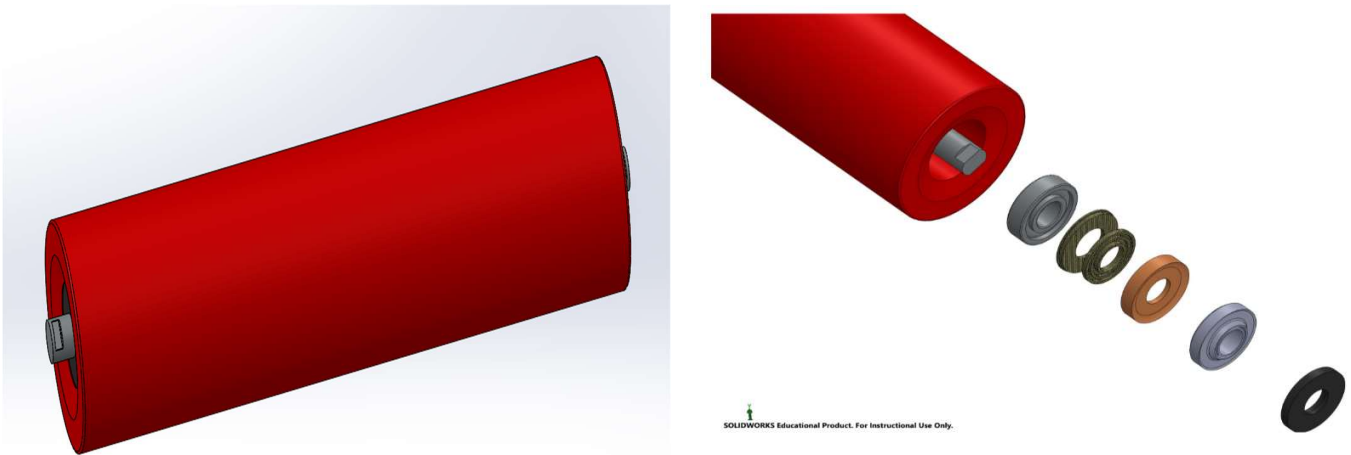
a) 3D CAD model of Idler b) Exploded view CAD model of idler
